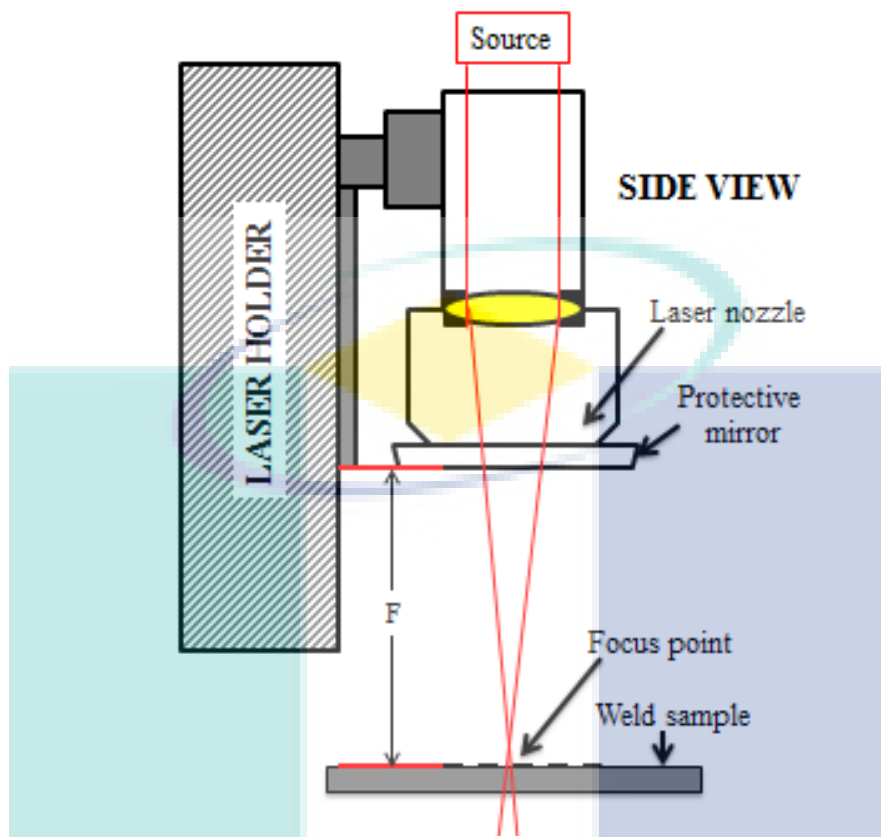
Fiber laser BOP welding setup.
